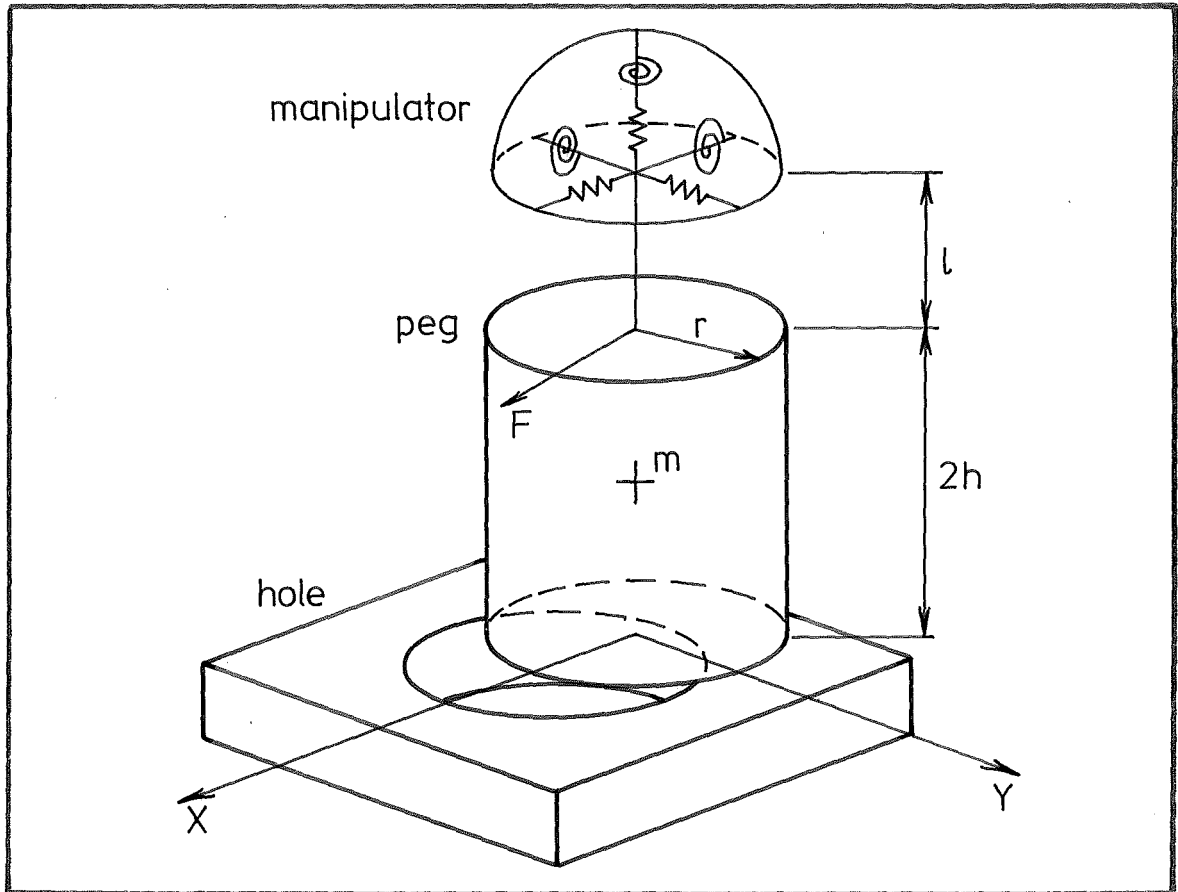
VIBRATORY ASSEMBLY DEVICE
